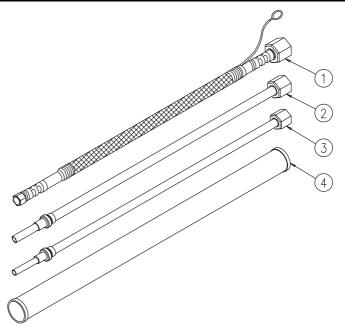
Power Cable Hose (for water-cooled torch) Parts List
